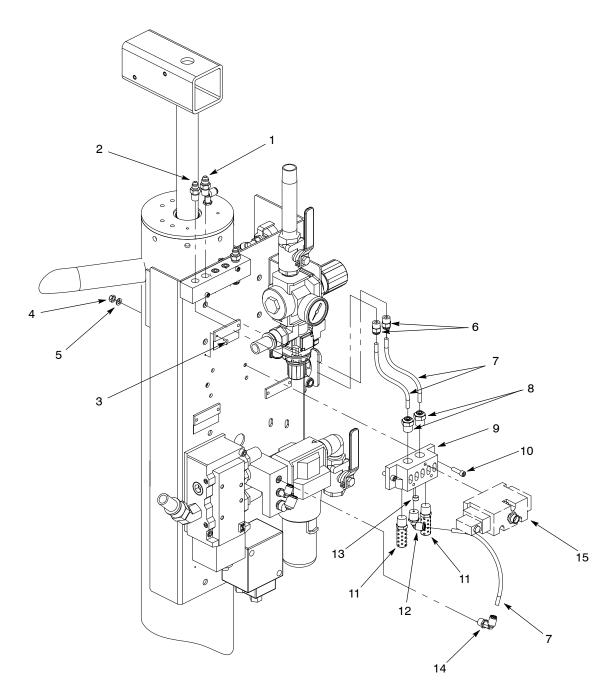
24 Vdc/120 Vac Automotive 125 Series Valve Base without DeviceNet I/O Block Cable
